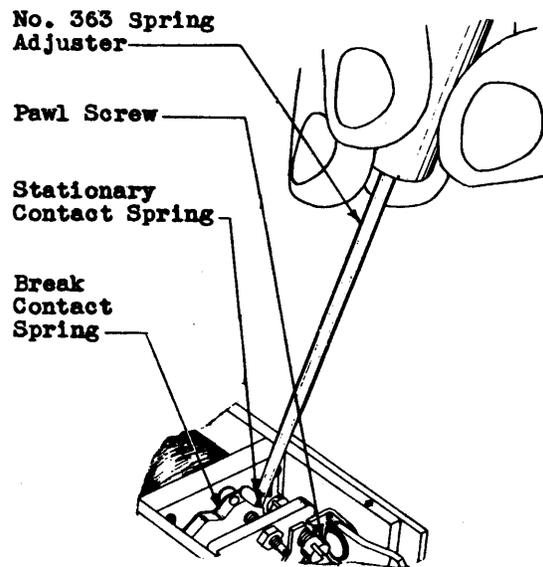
Method of Adjusting for Contact Separation on Break Contact Registers
